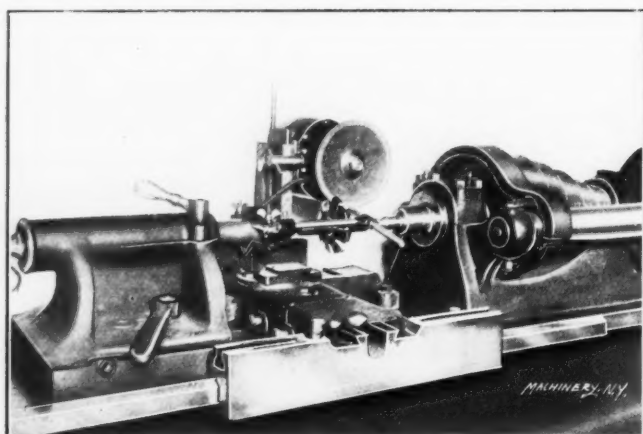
Sharpening a Gear Cutter in the Lathe with Tooth Rest clamped to the Tail-stock Spindle.
